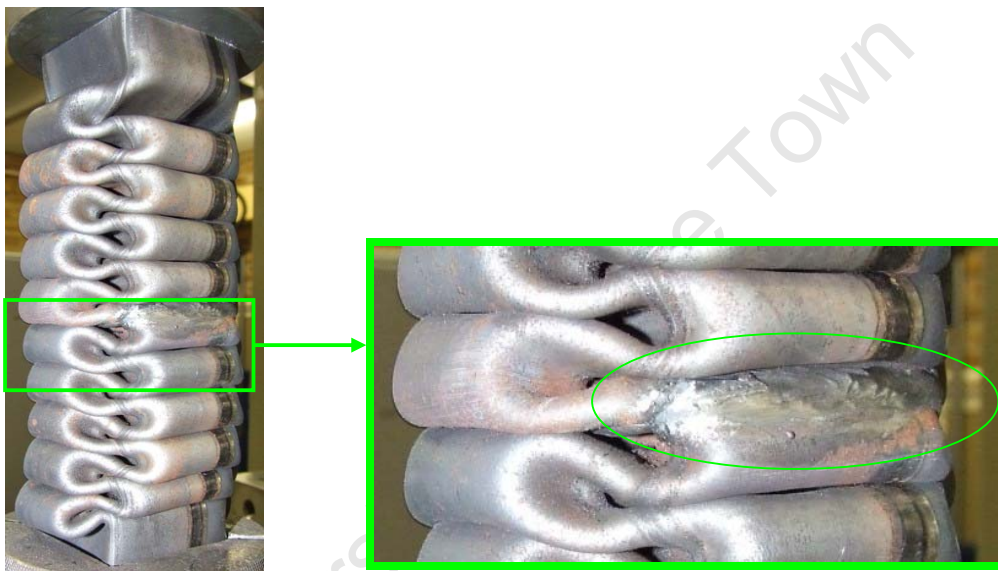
Specimen 300w300 showing how the weld becomes incorporated as a lobe.
